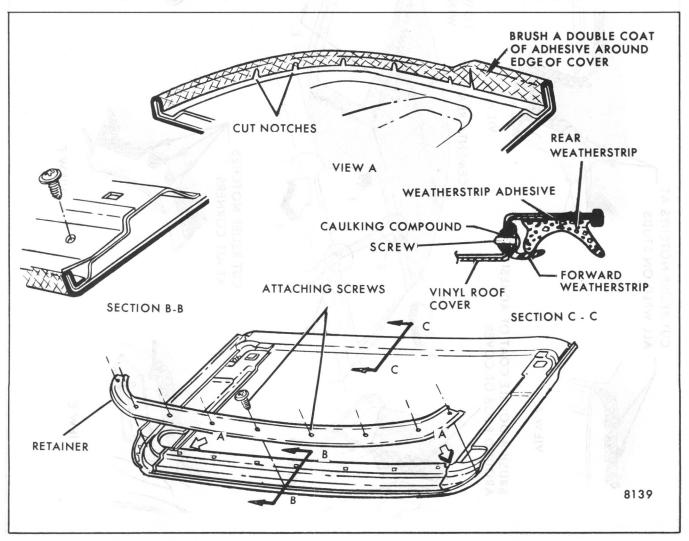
Fabric Roof Cover Installation on Sliding Sun Roof Panel (CA1 or CO3 Option)
